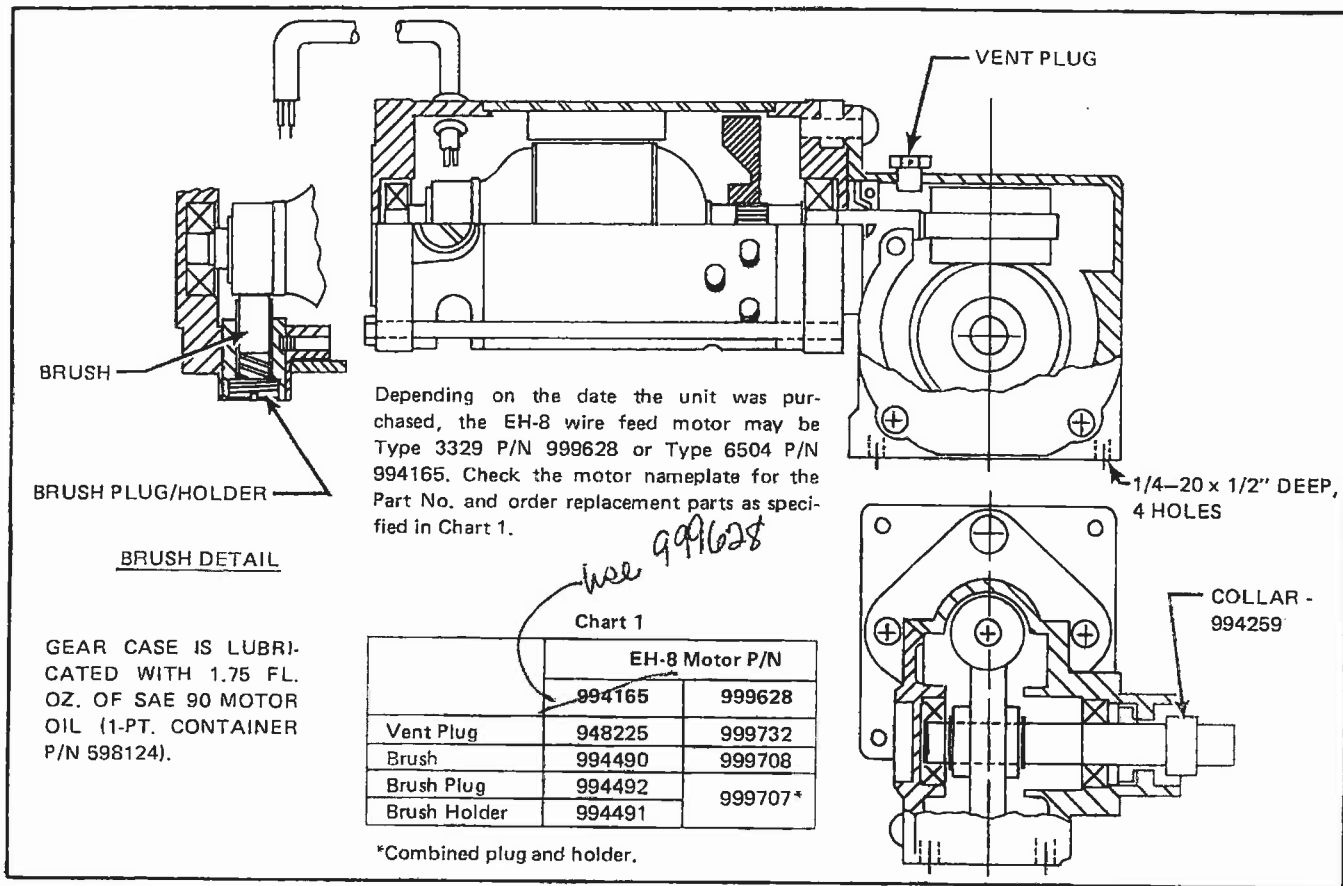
EH-8 Motor-Gear Unit Assembly, P/N 999628
